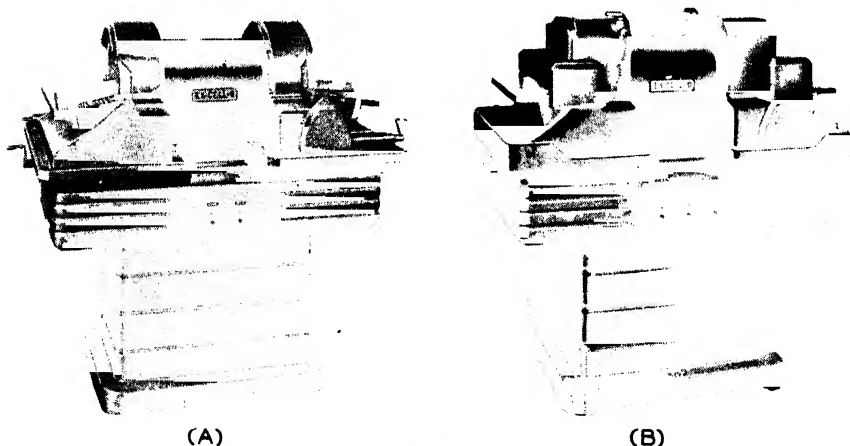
A Heavy-Duty Grinder with 14" Wheels (A) and a Similar Grinder (B) That May Be Used for Either Wet or Dry Grinding
